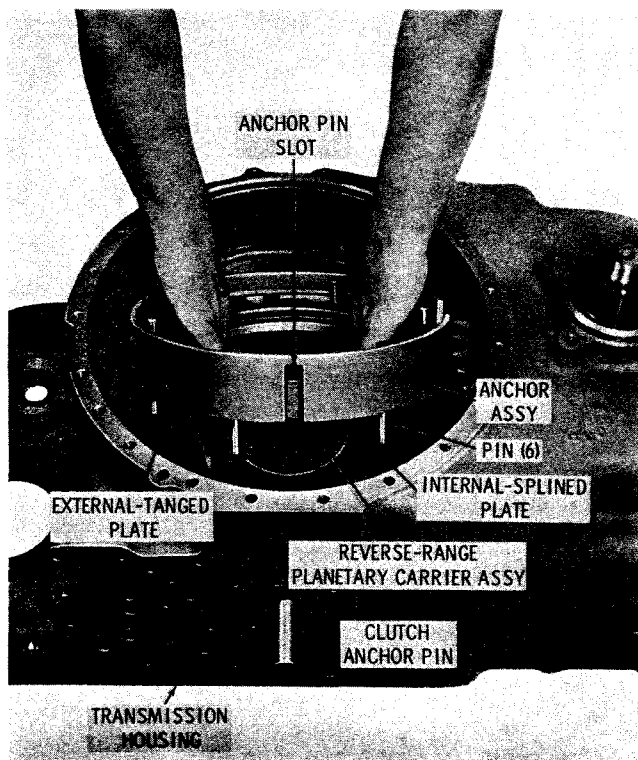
Installing reverse- and low-range clutch anchor assembly
